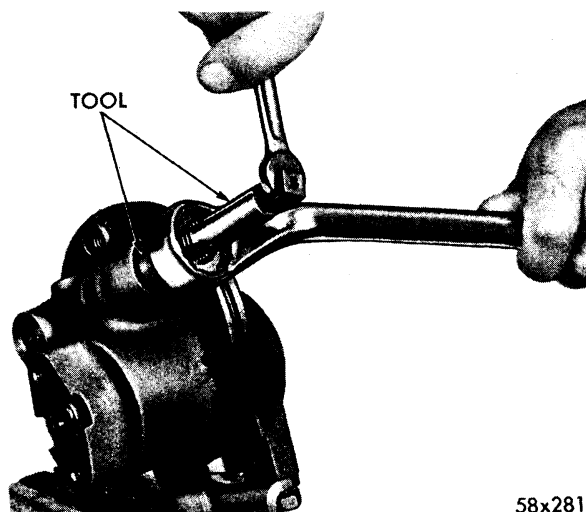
Removing Flow Control Valve Plug with Tool C-3655
